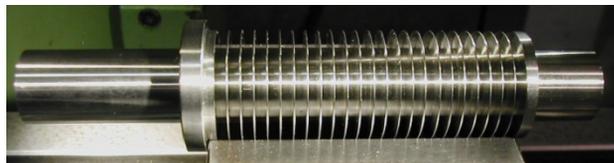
The new former for the target. Each coil will be wound directly onto the former, improving alignment and cooling of the magnetic assembly.
